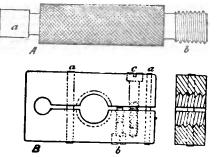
Screw Thread Gauges. (Pratt & Whitney Co.)
